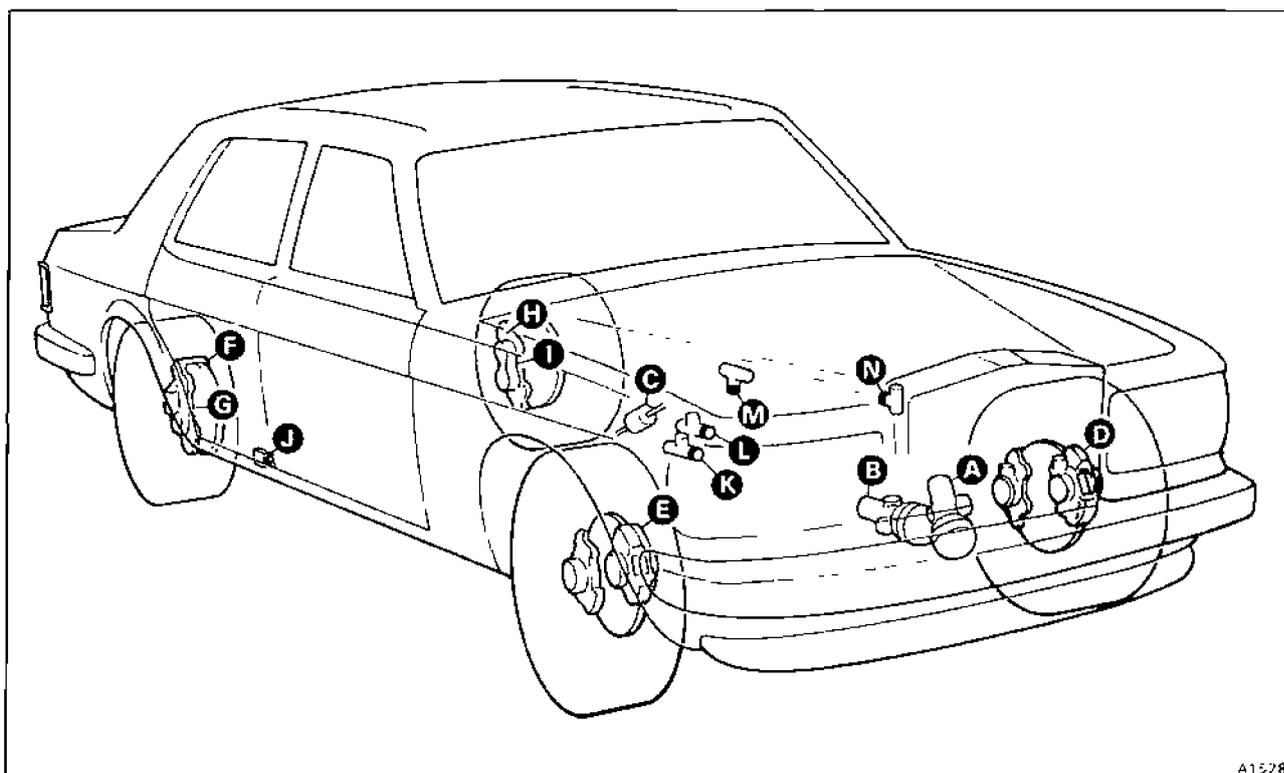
Anti-lock braking system bleed points and accumulator test service points (Turbocharged cars)
